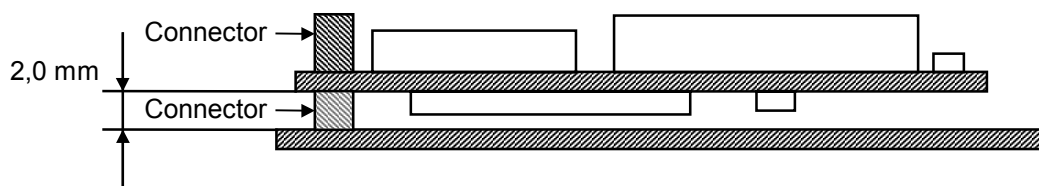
No components fitted on target PCB below HW 86050. Minimum distance between PCBs 2,0 mm
